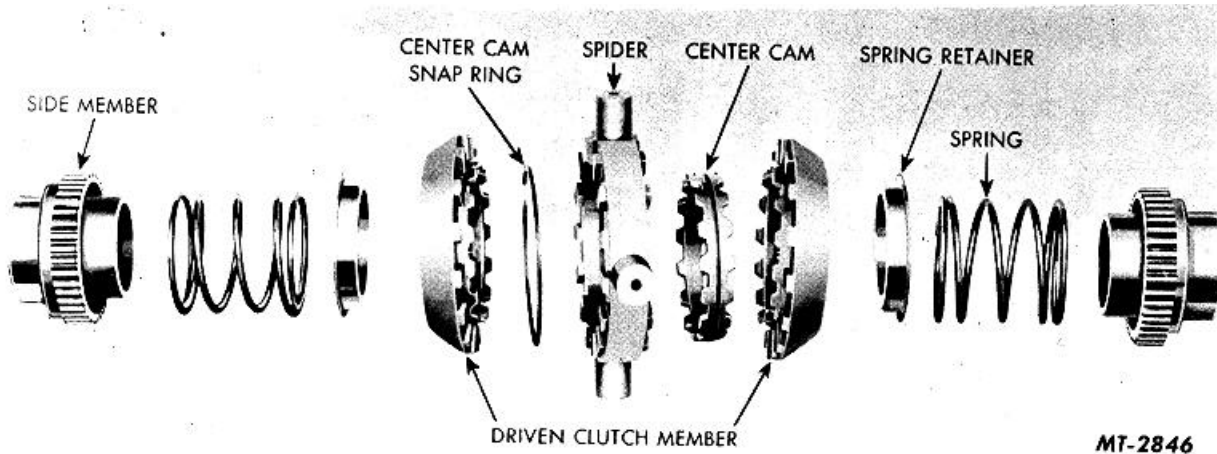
Internal Spring Design differential Locking Unit (Exploded View)
